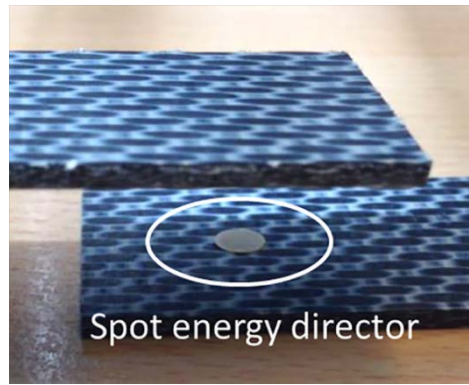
Spot energy director fixed on composite adherend prior to welding process.
